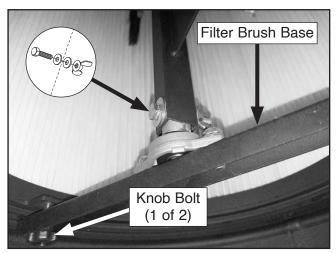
Filter brush base attached to filter brush assembly and canister filter assembly.
